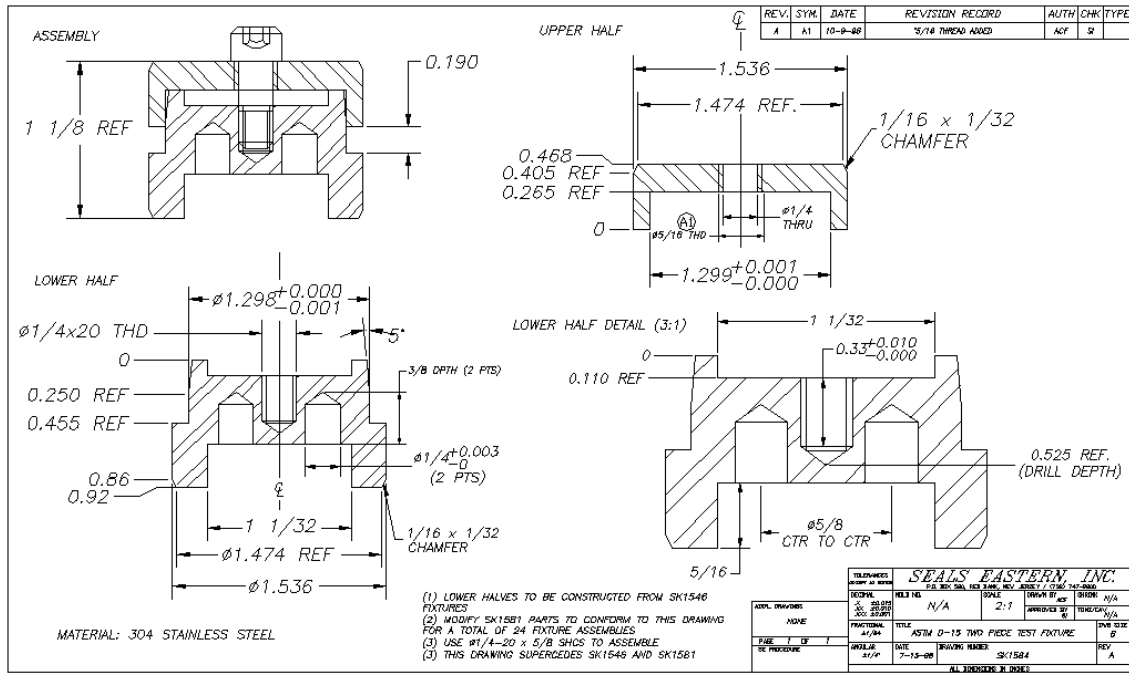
Two-Piece Fixture for Radial Compression of O-Rings
